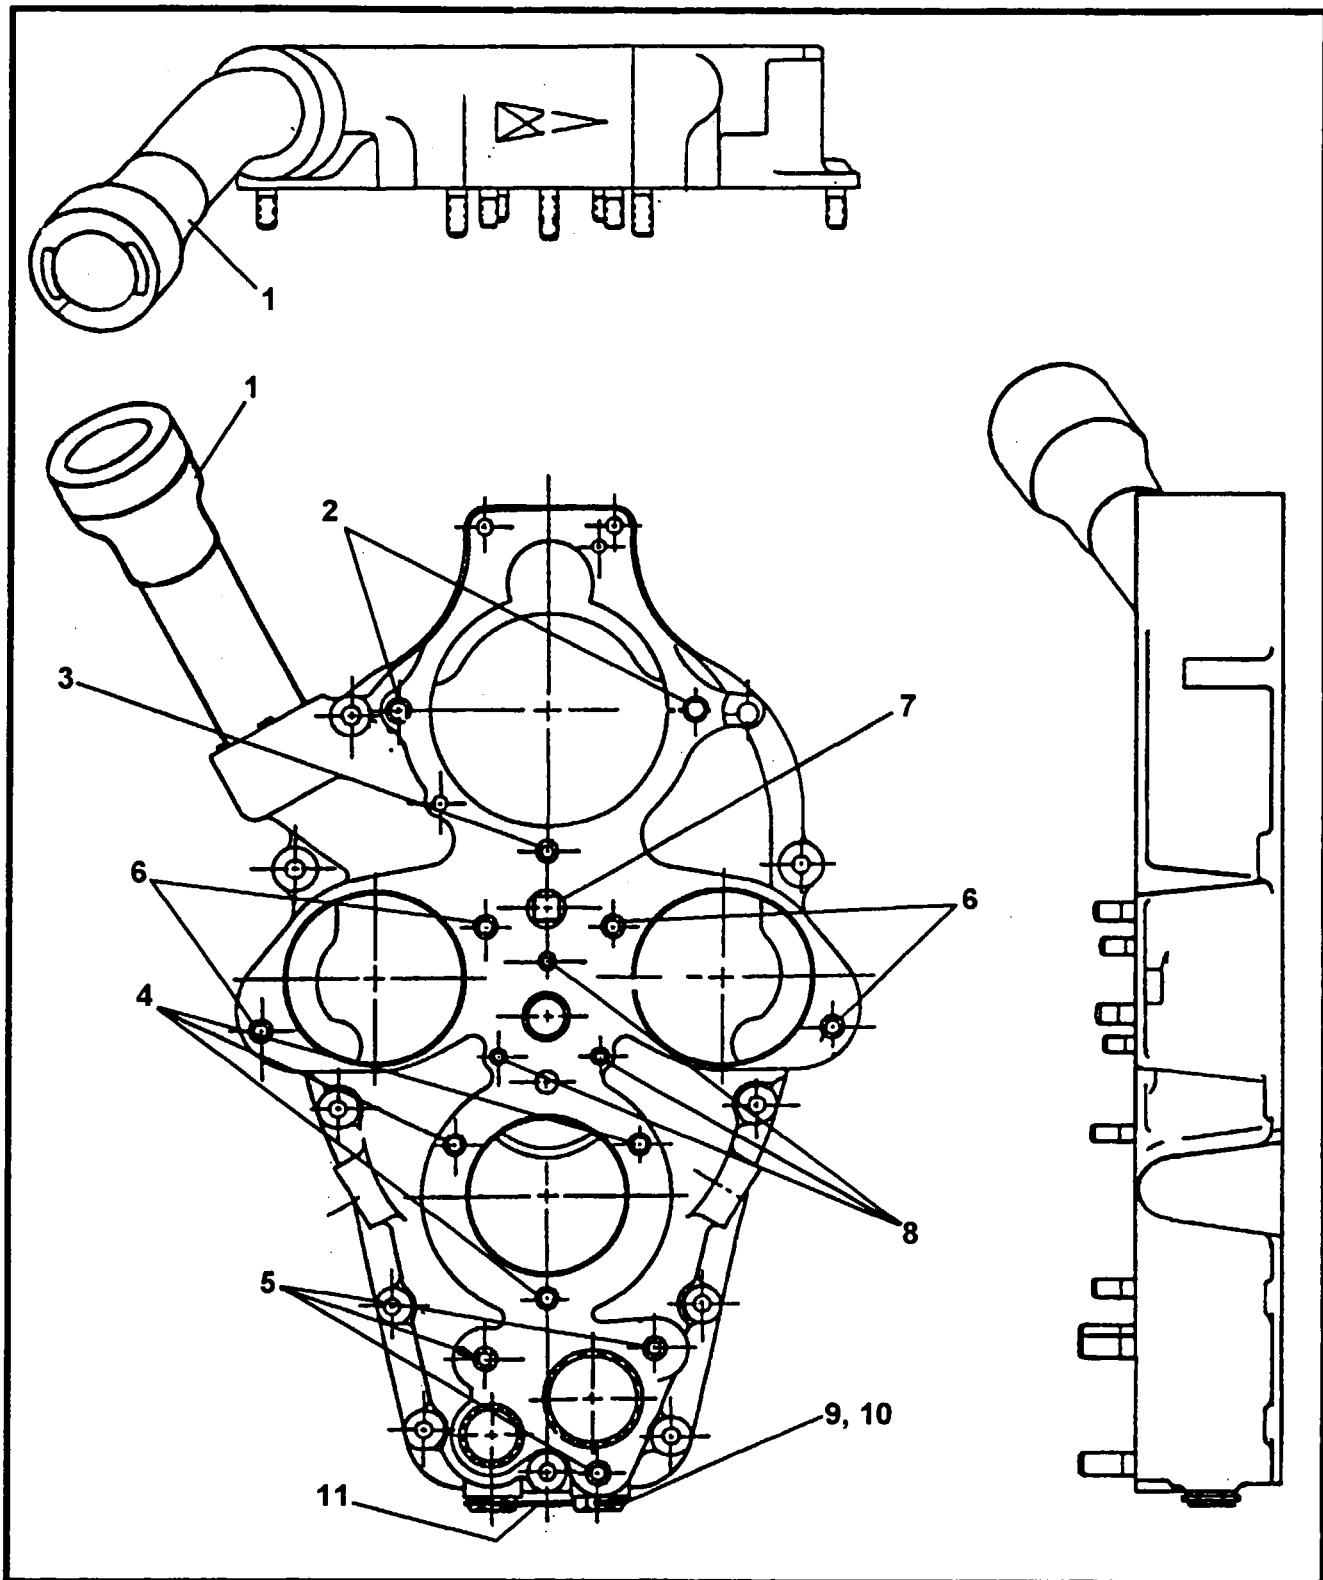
ACCESSORY CASE STUDDING ASSEMBLY
